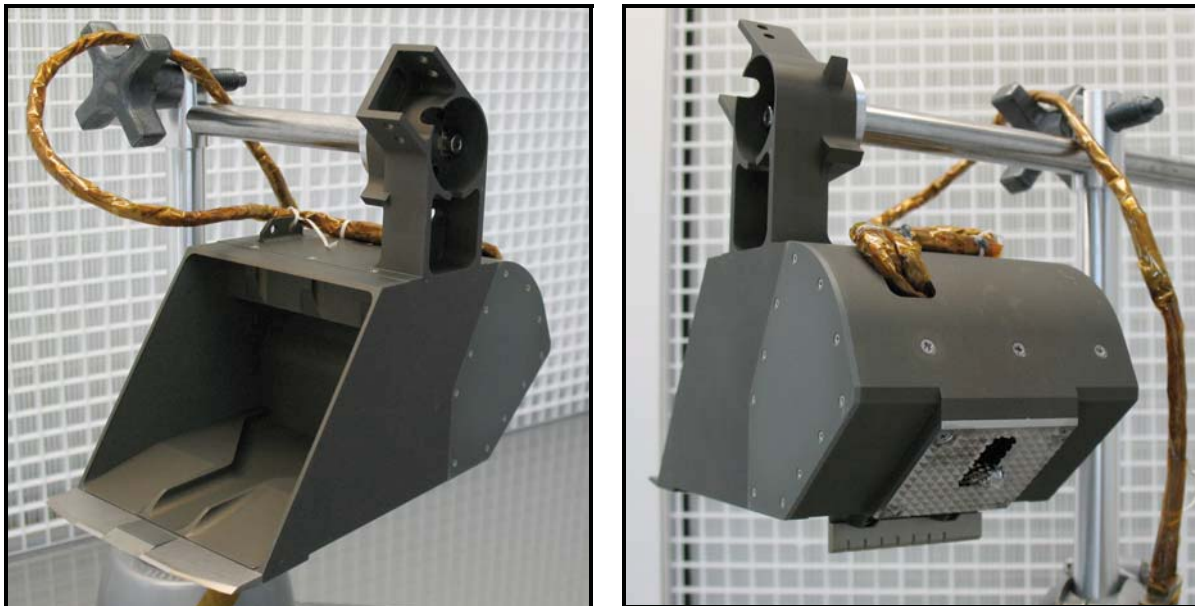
Icy Soil Acquisition Device Flight Unit on Assembly Fixture
